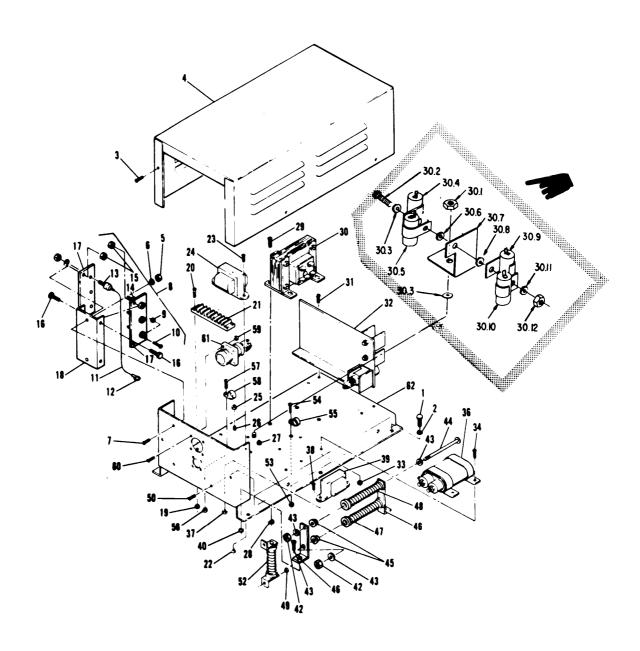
400 Hz Precise Relay Assembly Wiring Harness, Drawing No. 72-2260 (Sheet 2 of 2)
